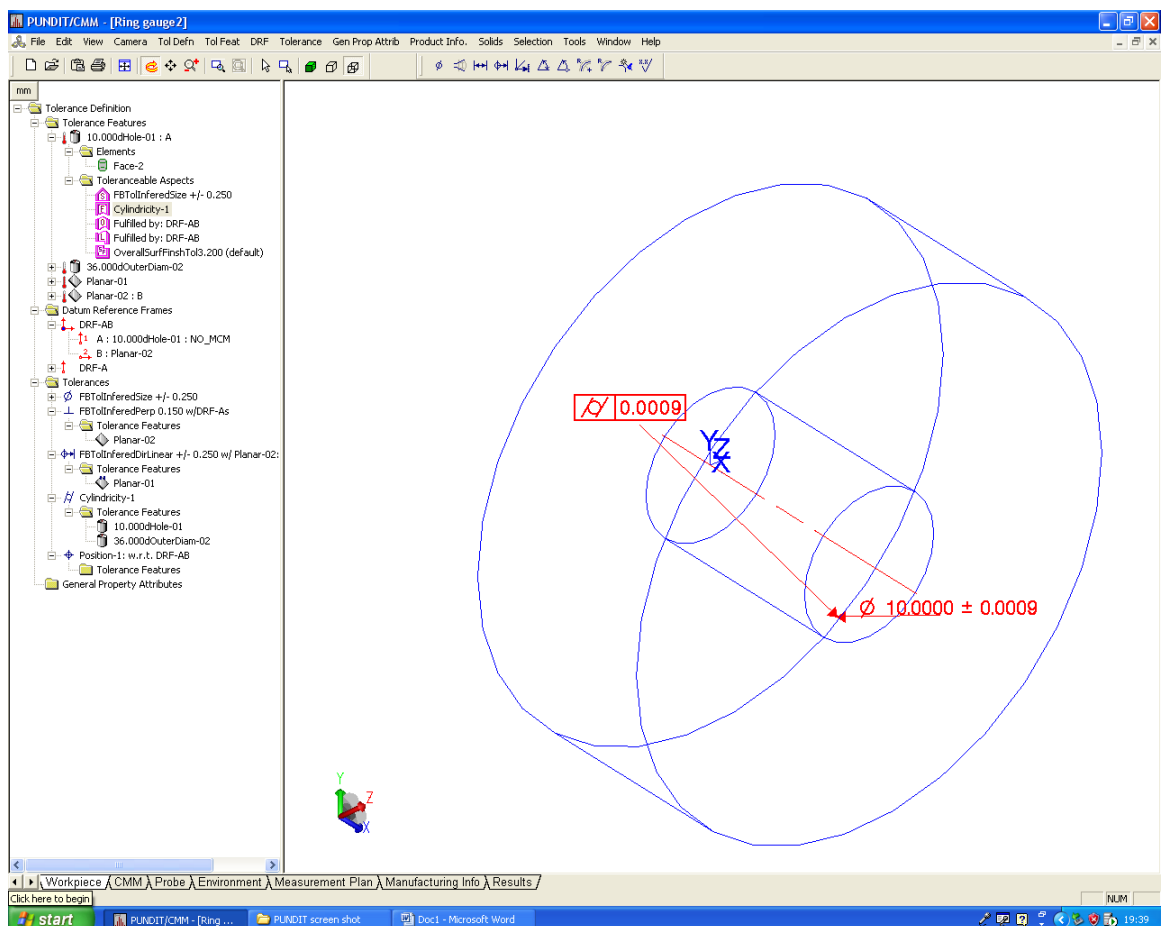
Assign the tolerances to the ring gauge CAD model
